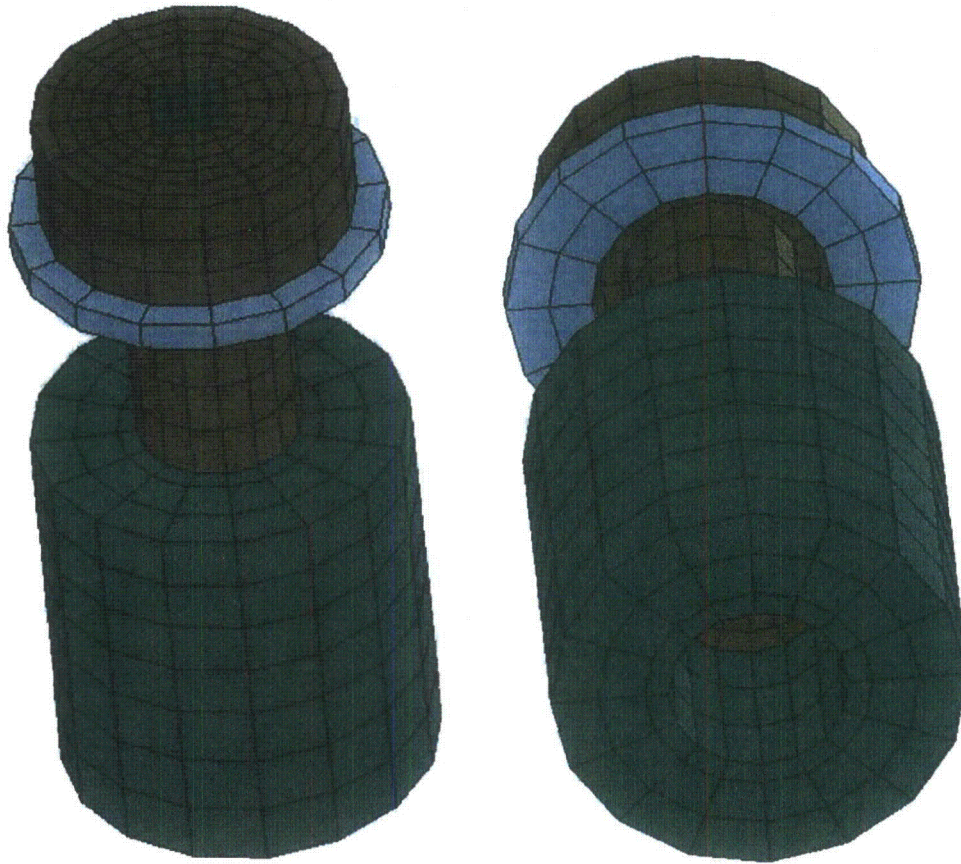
BU650B Body Bolt (Outer and Core Volumes), Welded Nut and Washer
